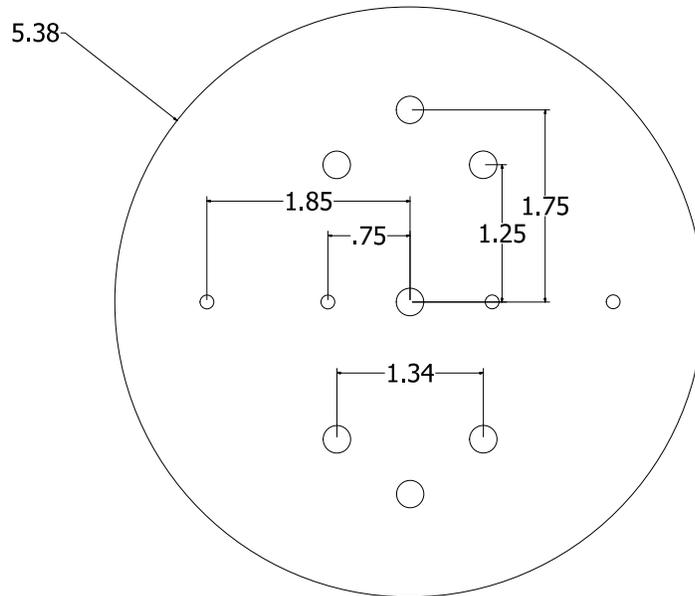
Avionics Bay End Cap Bulkhead Drawing
